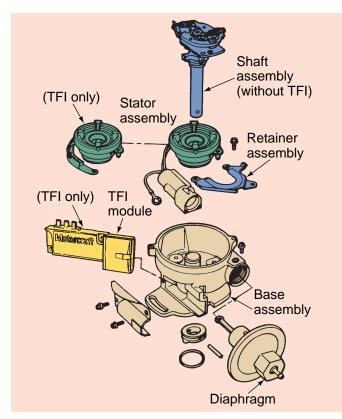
TFI distributor assembly. Courtesy of Ford Motor Company
